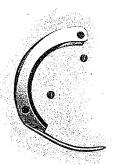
Figure H Gib and Screws Removed for Bobbin Case Replacement.
